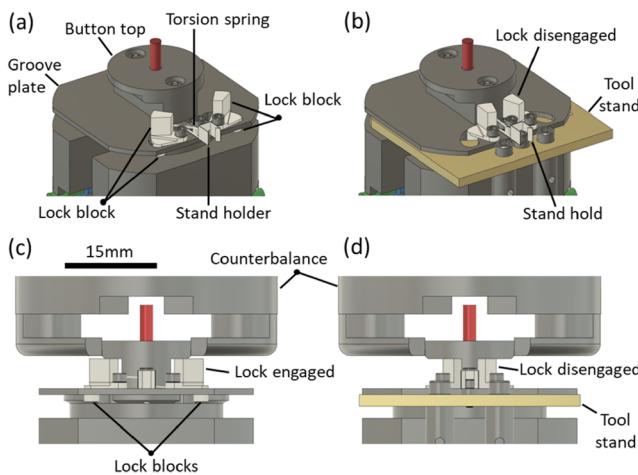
Schematic of the deposition tool height lock mechanism. (a) Height lock located on the back of deposition tool groove plate. Shown with the lock engaged (torsion spring extended). (b) Fork stand shown holding the deposition tool and disengaging the height lock. Fork stand contacts the lock blocks extending below the groove plate and collapses the torsion spring by rotating the lock blocks inwards and holding them closed. The lock's stand holder is connected to a post on top of the fork stand to fix the position. (c) Deposition tool held by counterbalance with the height lock engaged. This arrangement is used during the vertical transfer process when depositing the STM head. (d) Fork stand holding deposition tool while the tool is in the counterbalance showing the height lock disengaging. This arrangement is used to move the tool between the fork stand and the counterbalance.
